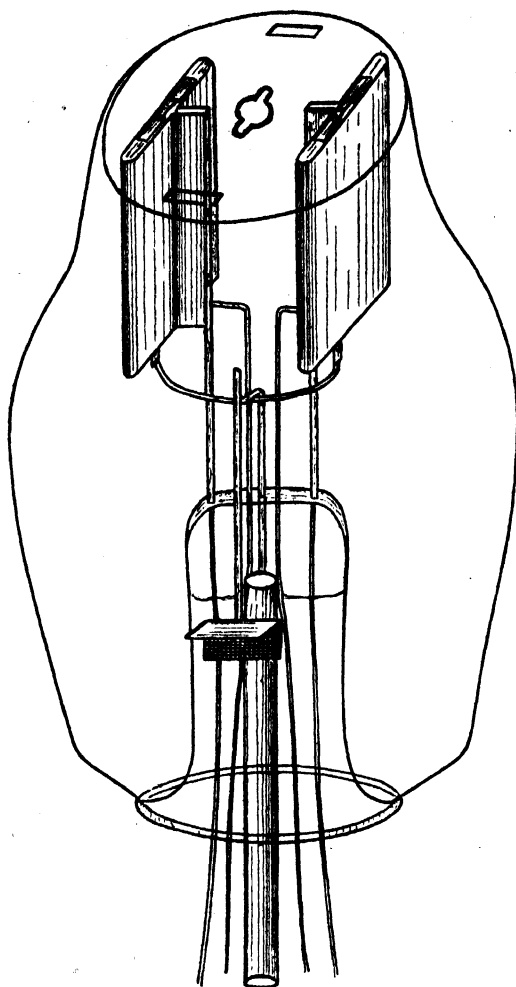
A TYPE 80 VALVE WITH ALL PARTS ASSEMBLED BEFORE EVACUATION.
